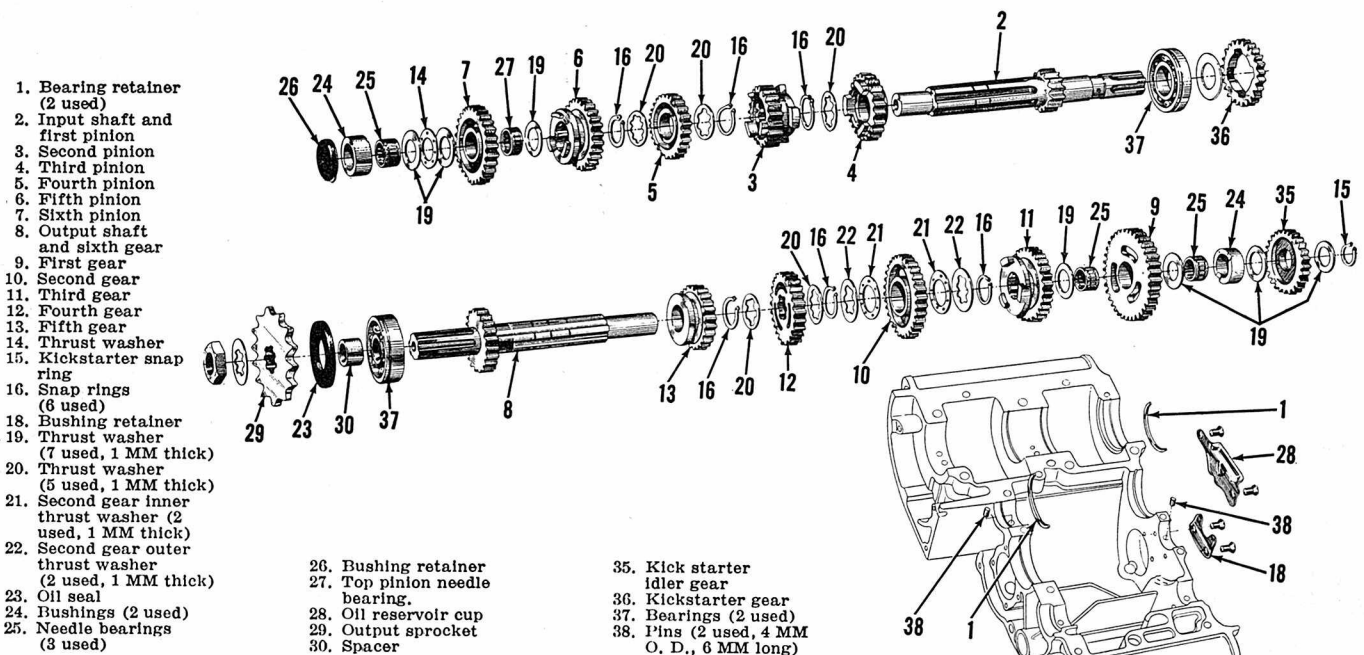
Exploded view of X-6, six speed transmission assembly.
